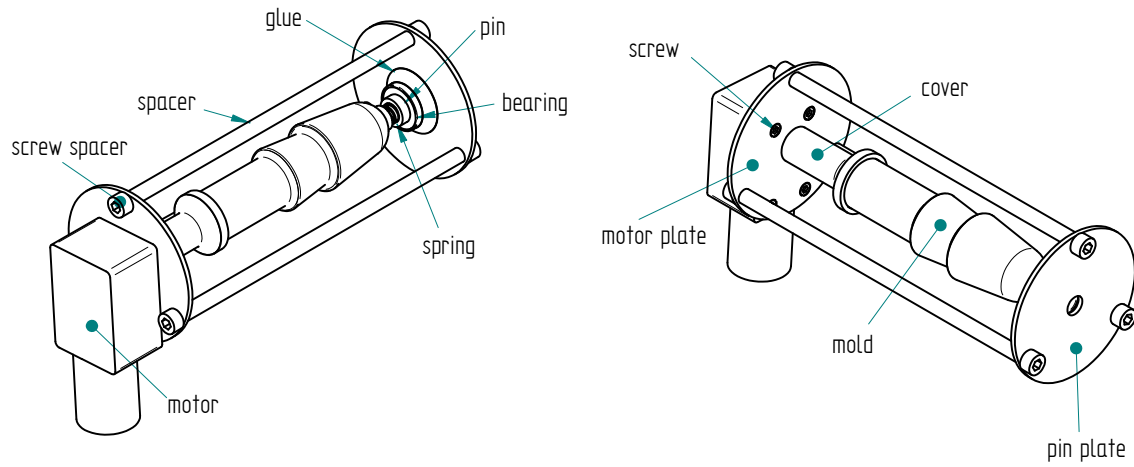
m2 accessories vac u lock adapter moldator parts
